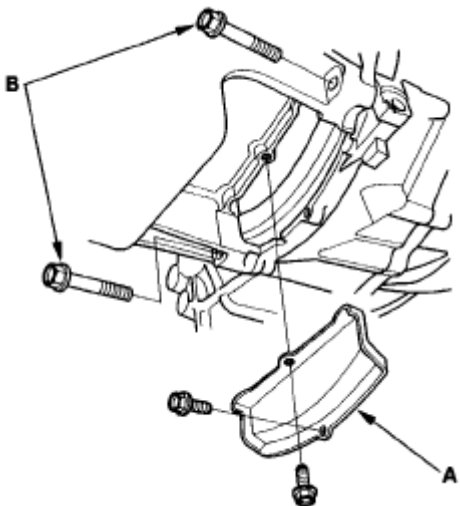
Identifying Shift Cable Cover (A/T Model)
